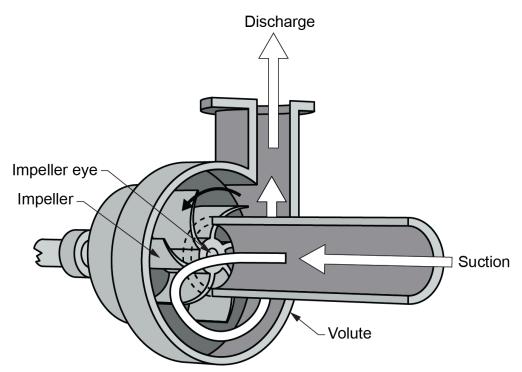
Centrifugal pump showing the impeller eye and the volute. (Skilled Trades BC, 2021) Used with permission.
